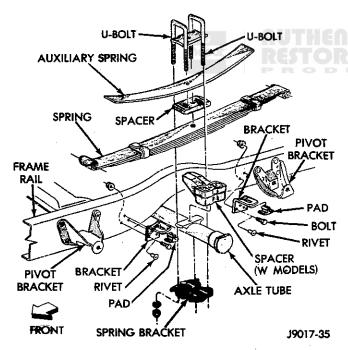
Rear Spring & Auxiliary Spring — D/W-250 & D/W-350 Vehicles
